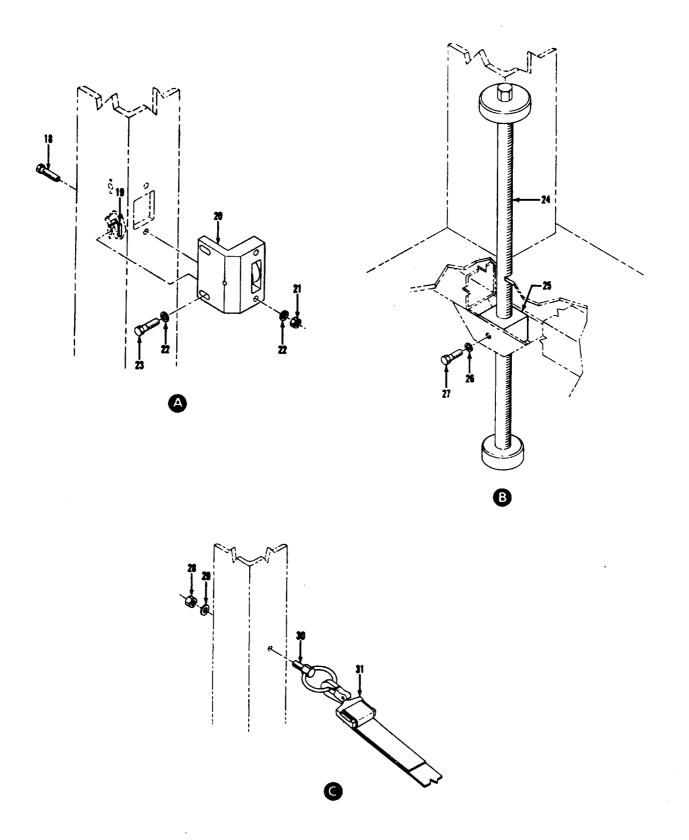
Hood Adapter Assembly (Sheet 2 of 6)
